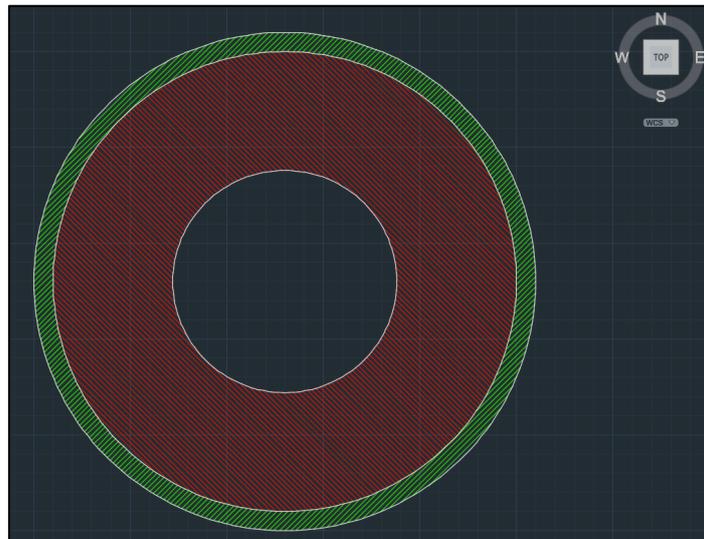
Cross Section of Rocket HF-003 (from tail forward ahead of fins)
